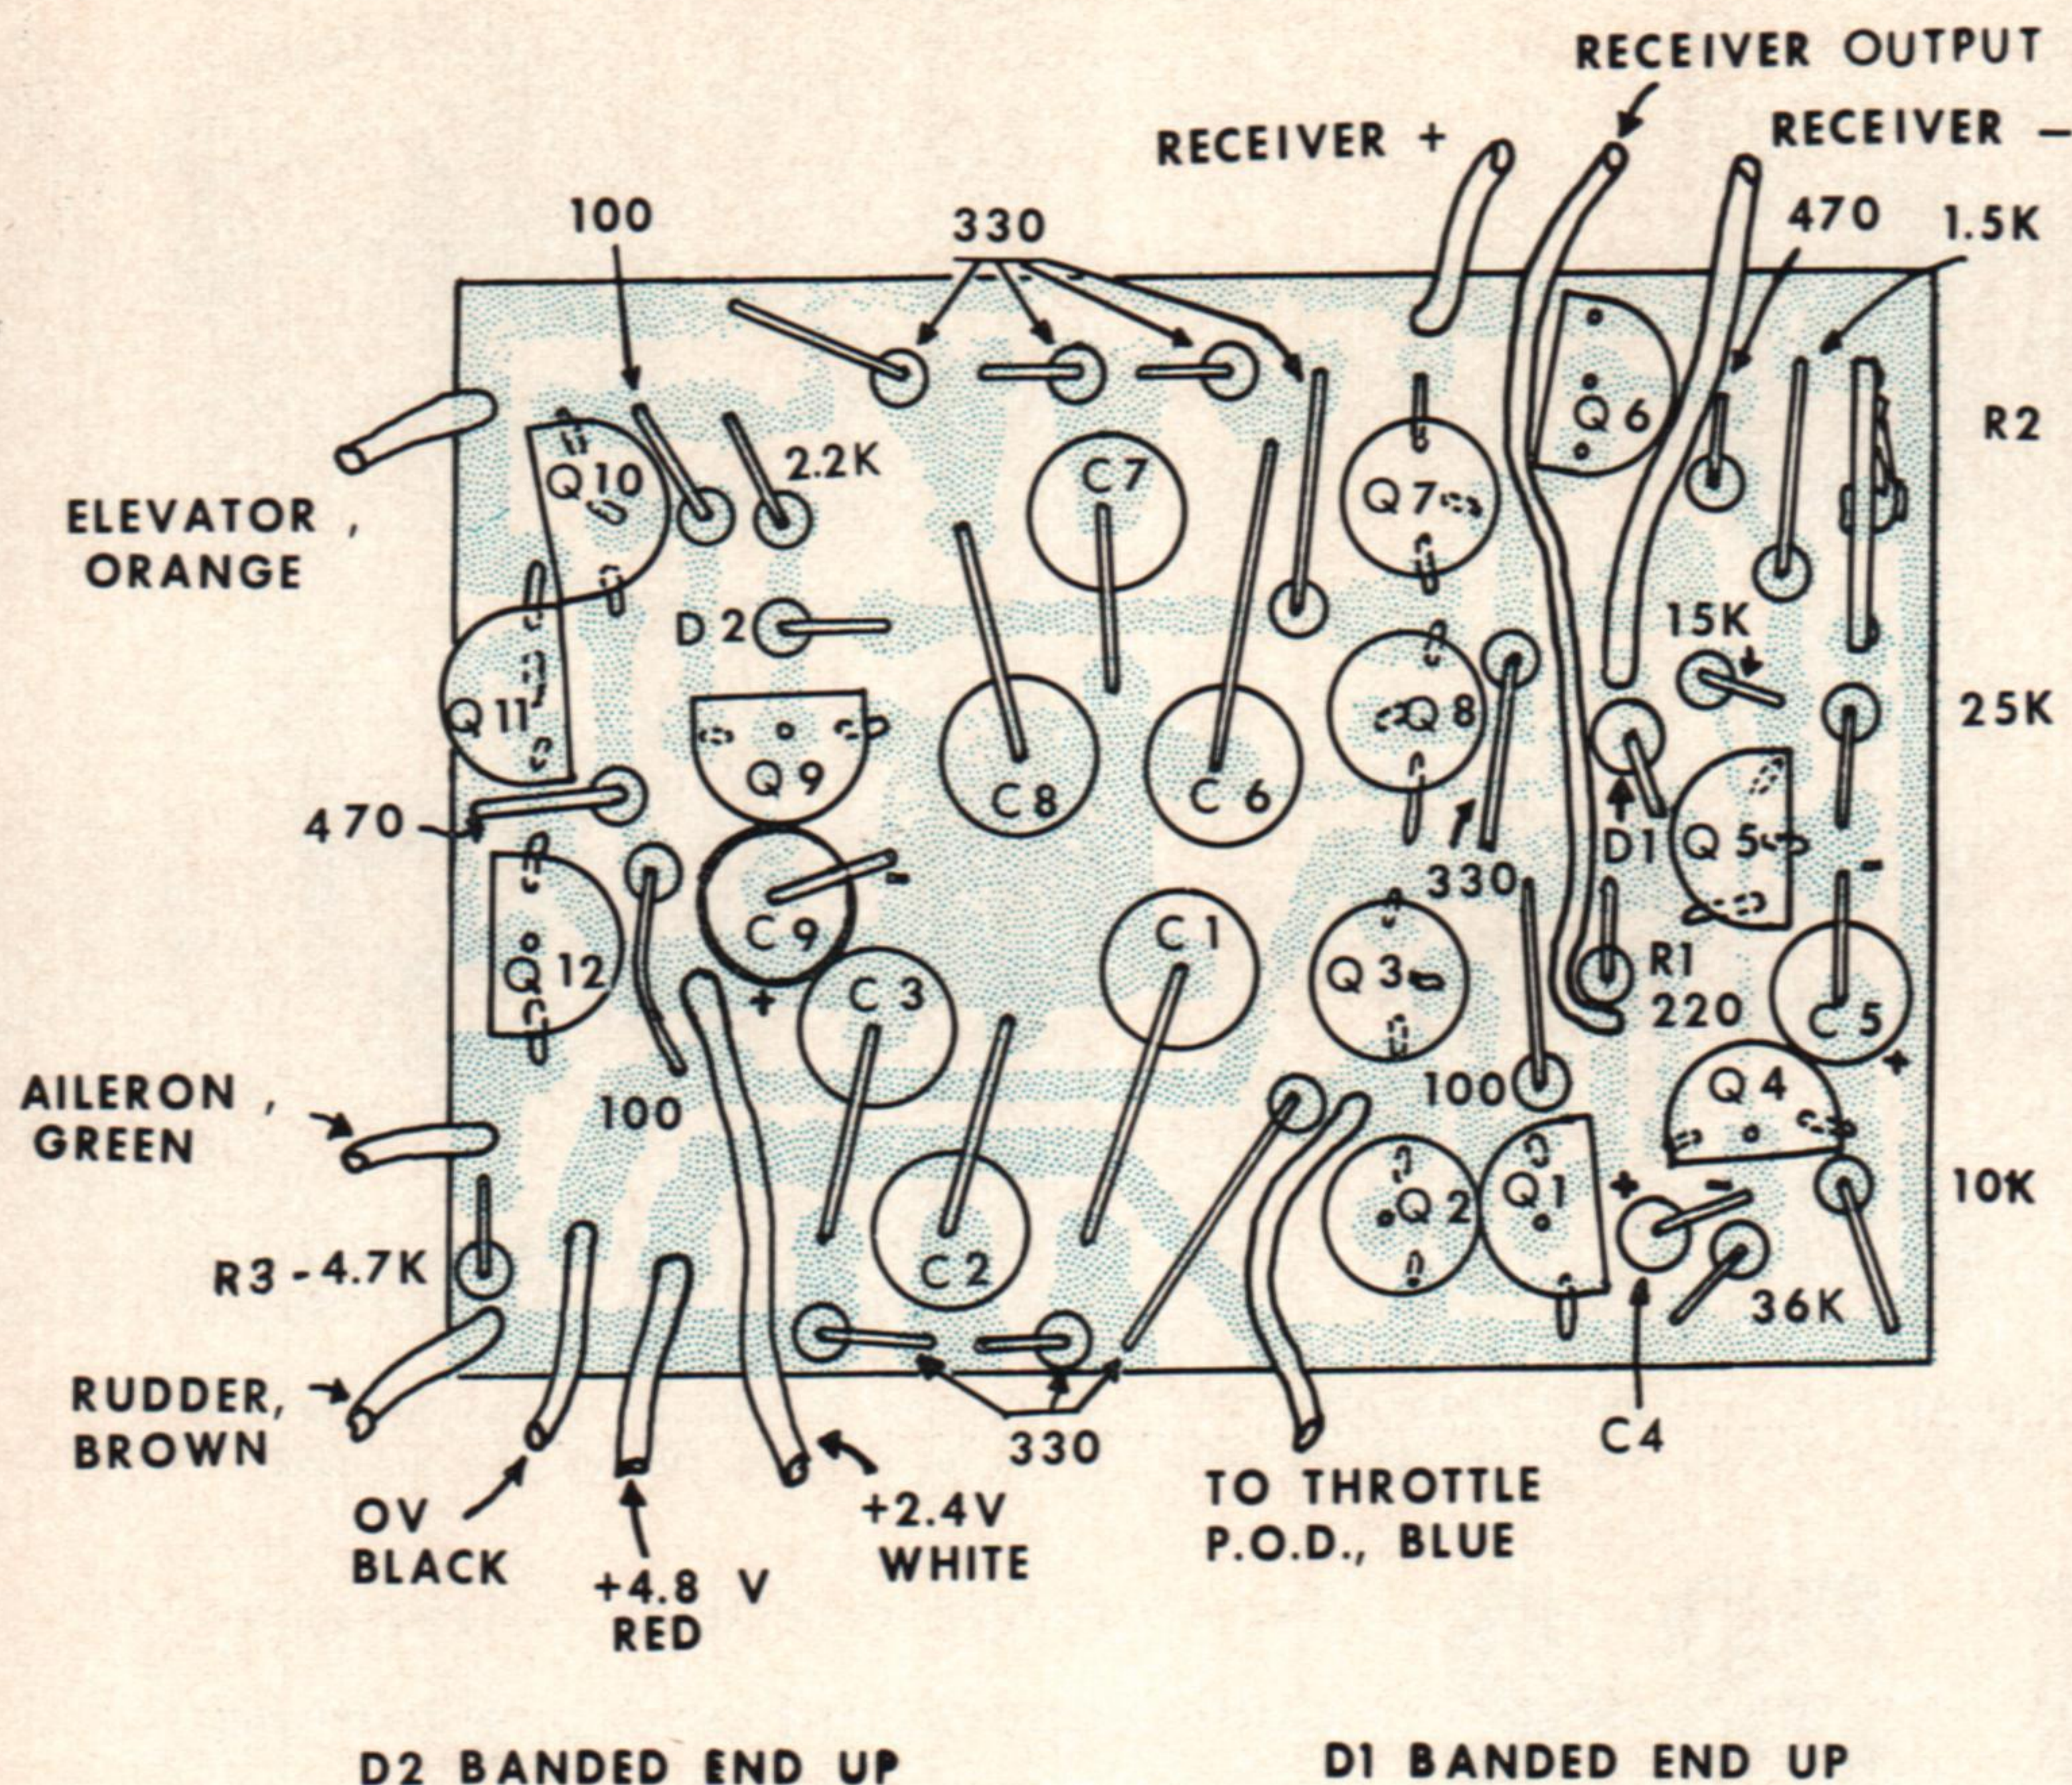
Parts placement diagram for decoder with filters and lock-out POD. Mount all capacitors with positive end toward PC board. Each piece should be as close to PC board as possible; be especially careful with Amperex transistors.
